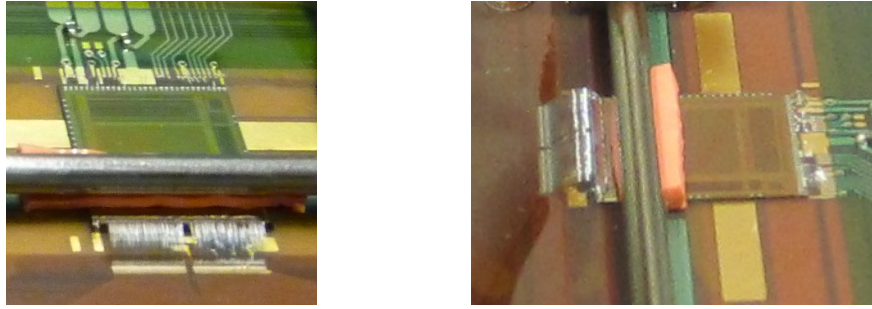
A close-up view of the Origami module, showing the 0.5mm and 1.0mm thick Gap Pad 86/125, respectively, assembled between APV and tube.
